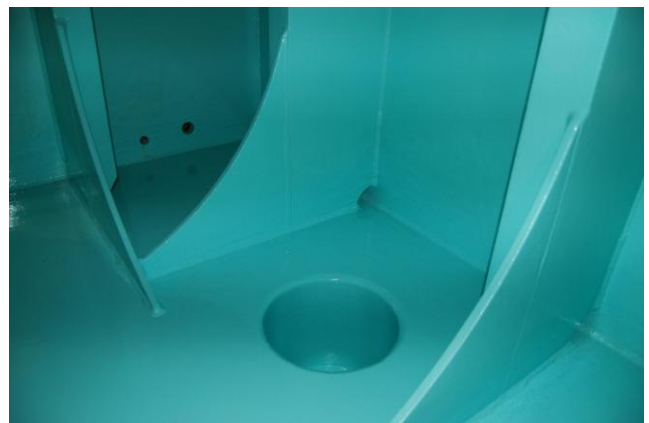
This tank has a drain well, and the stiffeners are placed vertically, with drain cavities against tank floor. Consequently the tank is easy to drain (Photo: Eyvind Andersen)
